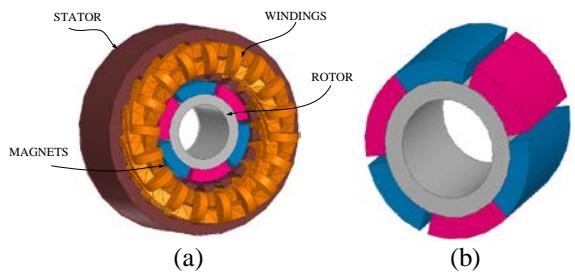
Proposed BLDC motor; a) entire structure, b) rotor with magnets.
